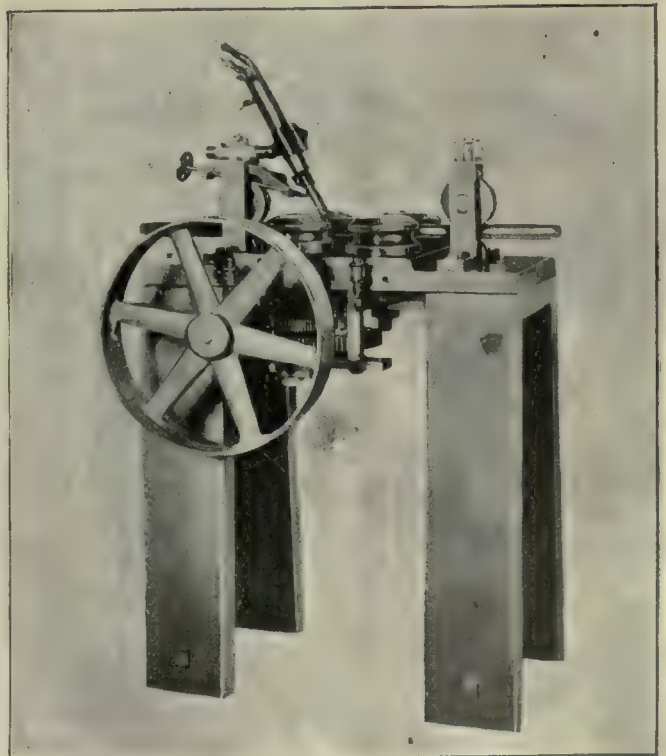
SINGLE-TORCH TUBE WELDING MACHINE
